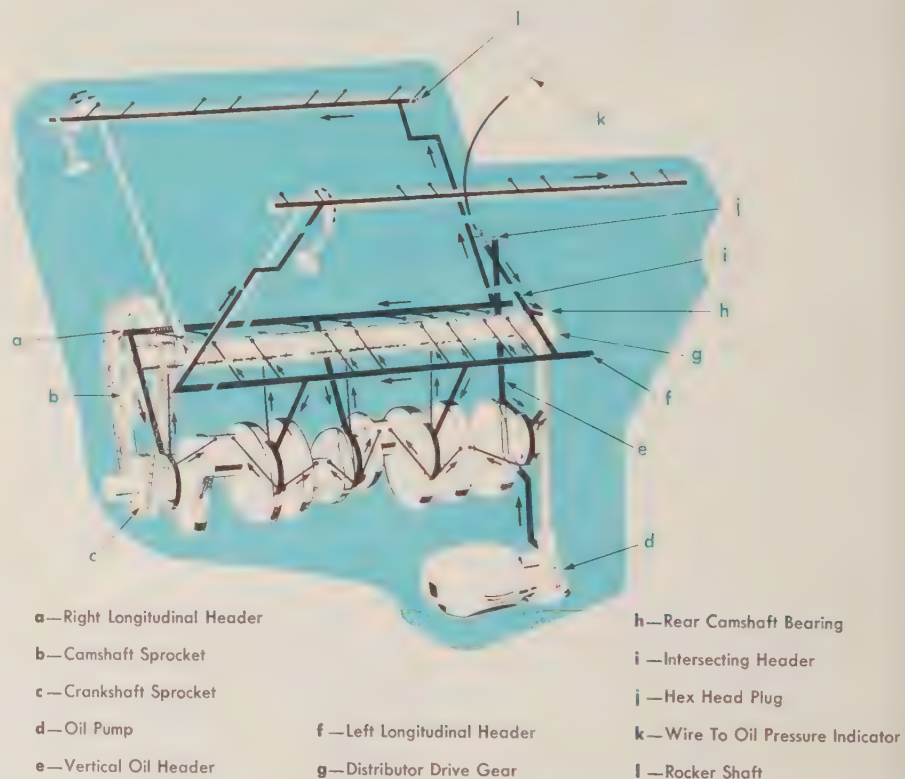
Phantom view of a typical lubrication system of a V-8 engine illustrating how oil is fed to the hydraulic valve lifters. Oil is forced by the pump through the rear bearing cap to the vertical oil passage, where it flows to the right oil passage, through the connector, to the left oil passage. The oil in both the right and left oil passages flows to the lifters through small drilled holes which connect the passages with the lifter holes.
